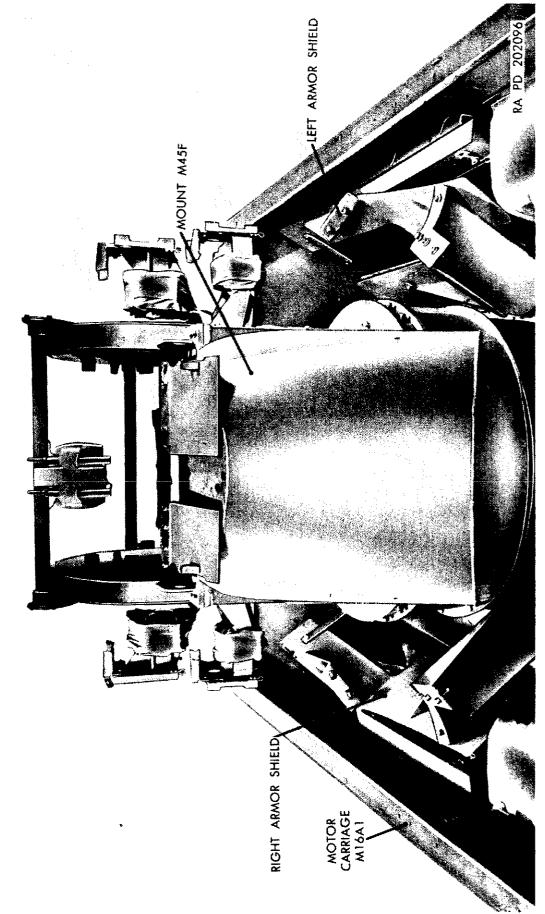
Mount M45F on carriage M16A1—armor shields off.
